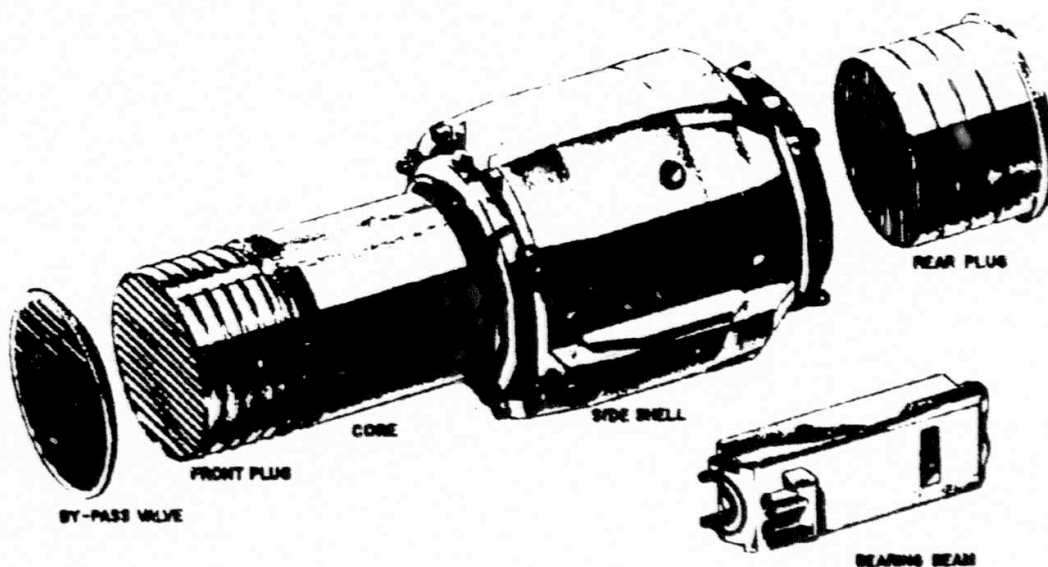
Reactor shield assembly (Dwg G-1211)
